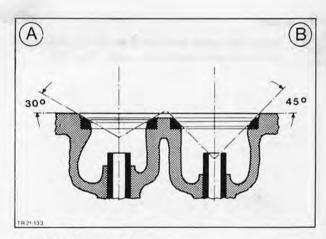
Valve seat angle A – Exhaust valve B – Inlet valve
